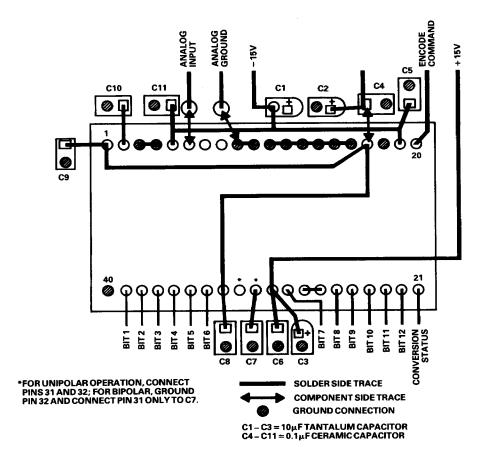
AD9003 Suggested Layout (As Viewed from Bottom – Not to Scale)
